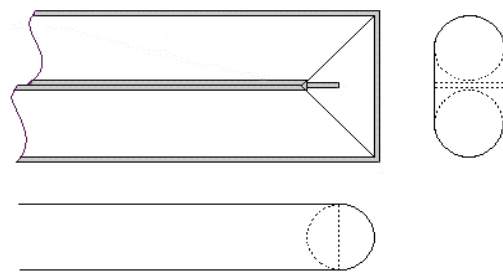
, Cross-section and inside dimensions of double miter bend and segmented disk
